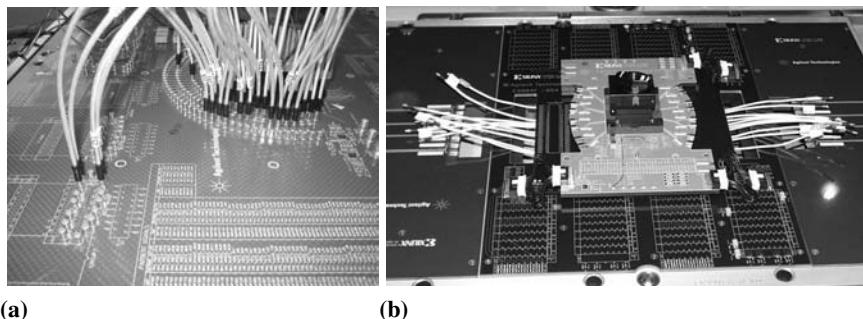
Test fixtures for the Verigy V93000 ATE system using coaxial cables to address the PCB signal trace loss: (a) a single board approach and (b) a mother/daughter card approach.
